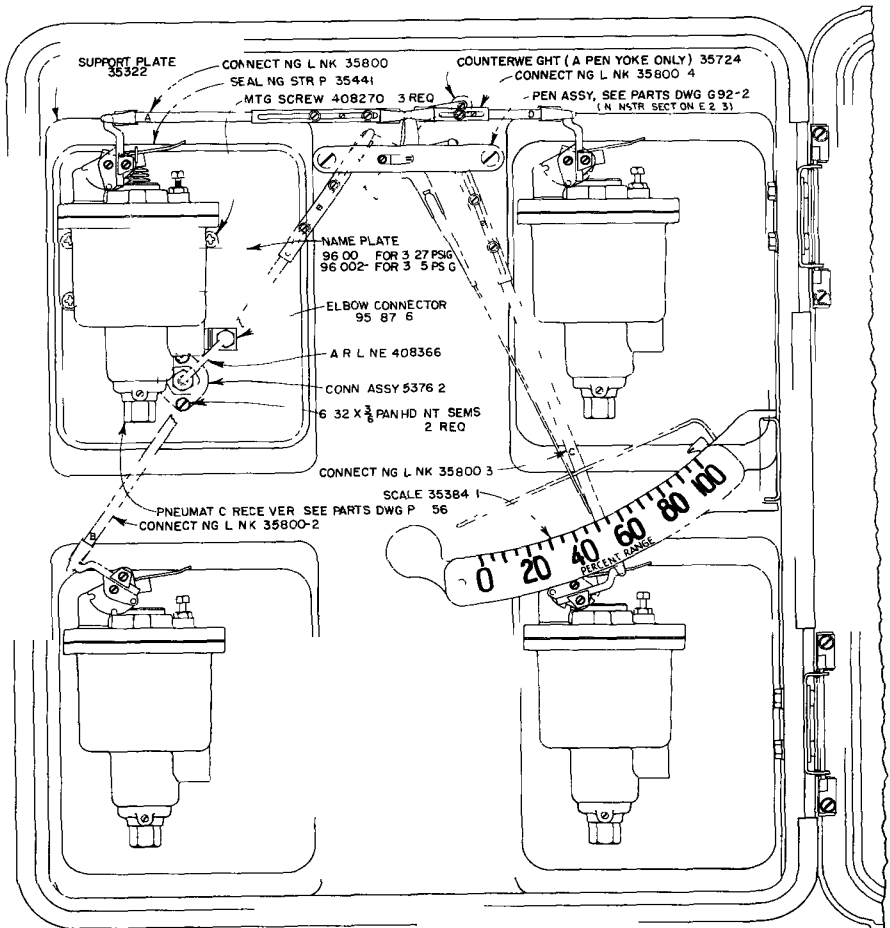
Parts Drawing P11-5, Class 8 Receiver Accessories and Linkage
